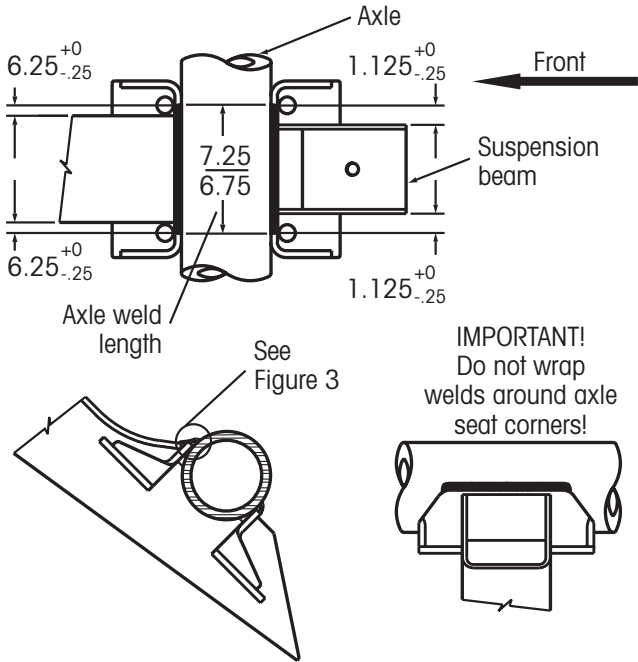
and A3 show the length and position of the axle weld. All weld passes are to be performed as shown.
